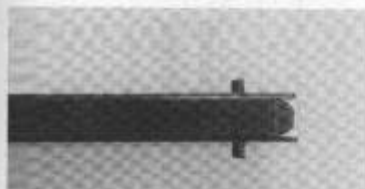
Rear view of magazine with block held in position with spring pin.
